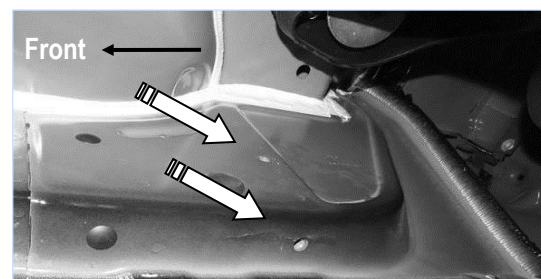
Remove Plastic Plugs to Uncover Threaded Inserts
